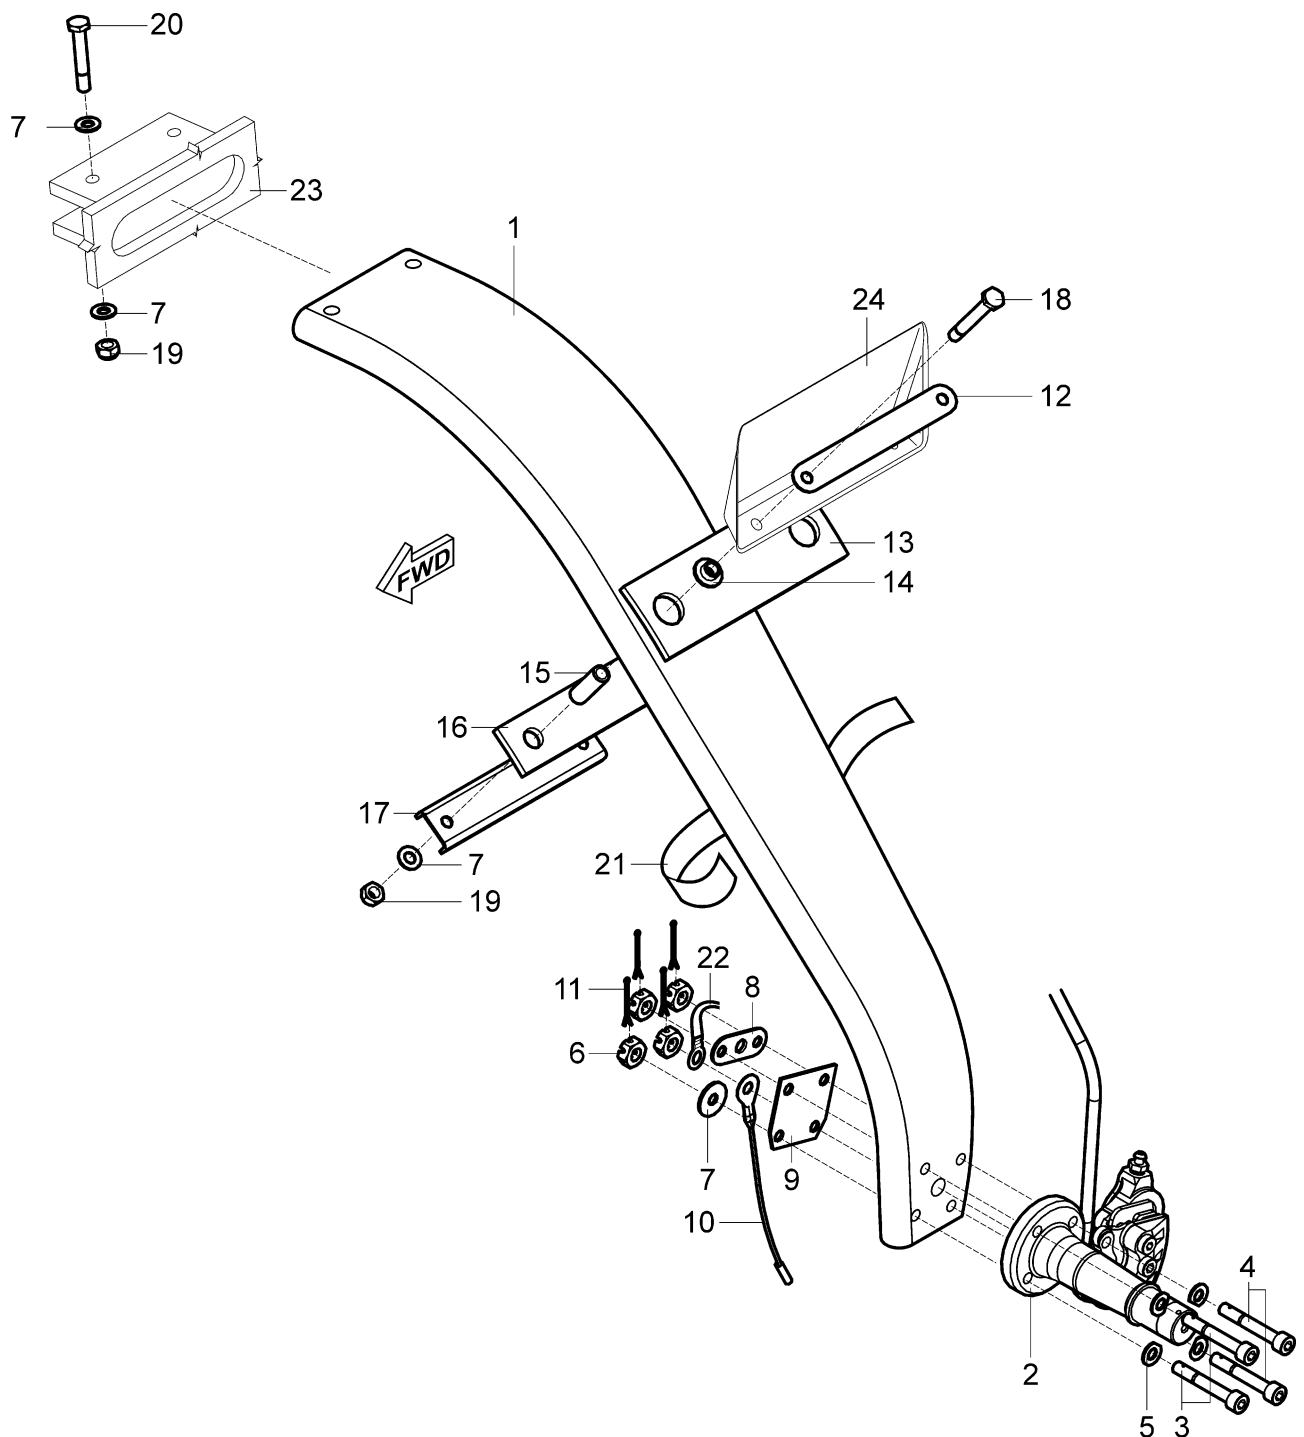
Main Landing Gear Leg Removal / Installation (page 1 of 2)
